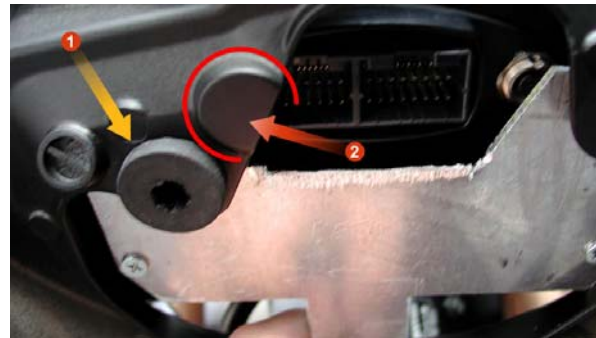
chassis to be milled (2) and anti-vibration mounting (1).
